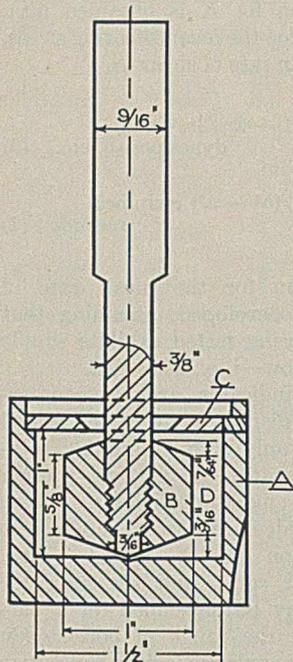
DIMENSIONAL SKETCH OF ROTOR AND STATOR
